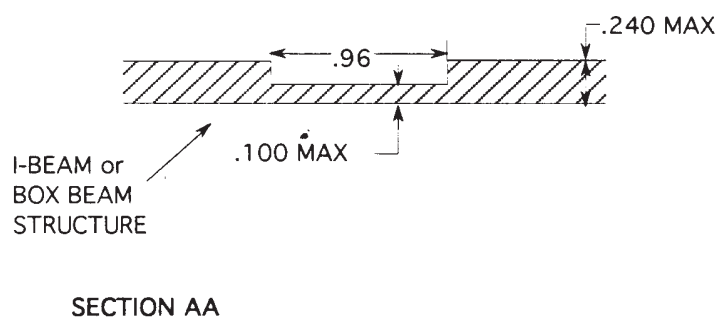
HANDRAIL CROSS SECTION (ON-ORBIT INSTALLED)
